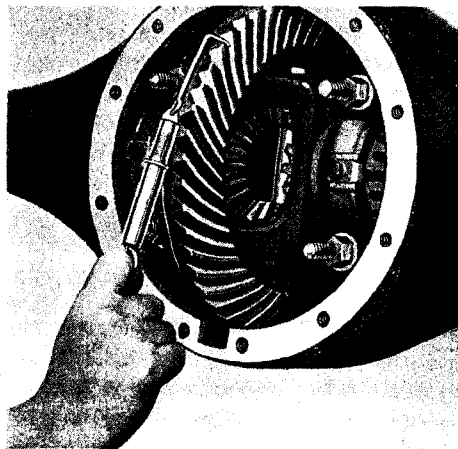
Checking adjustment of differential side bearings. A pull of 8 to 10 pounds should be required to turn the ring gear.
